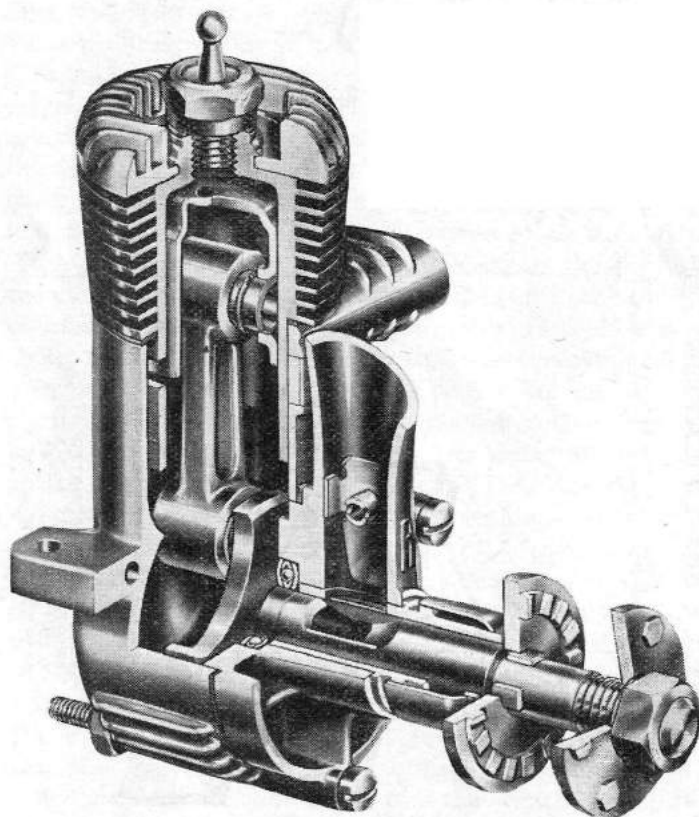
The well-known "Ohlsson and Rice 23" glow plug motor shown in section with robust connecting rod and crankshaft with rotary induction port. Ball races are fitted.
